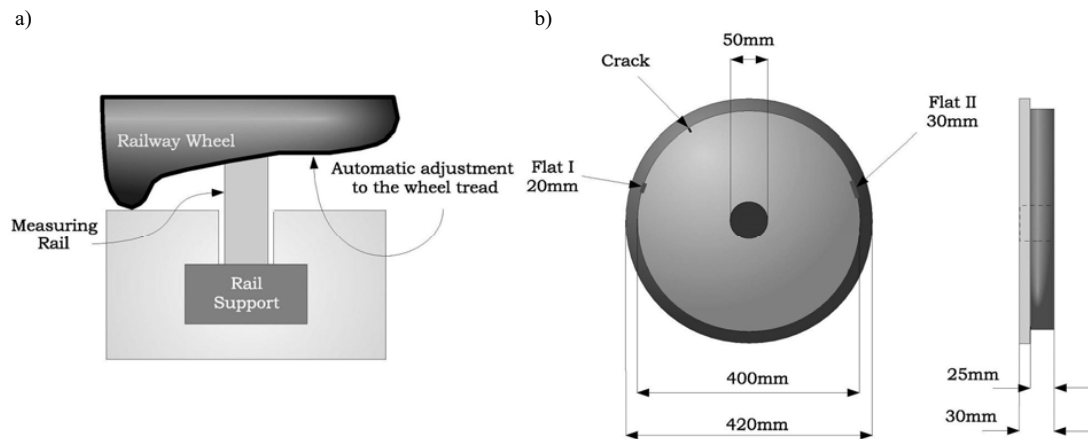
a) Measuring rail construction. b) Wheel dimensions
